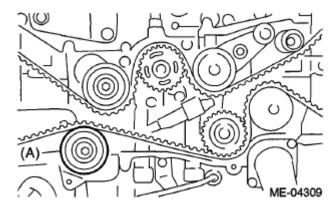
Identifying Crank Sprocket And Cam Sprockets Dimension Courtesy of SUBARU OF AMERICA, INC.
